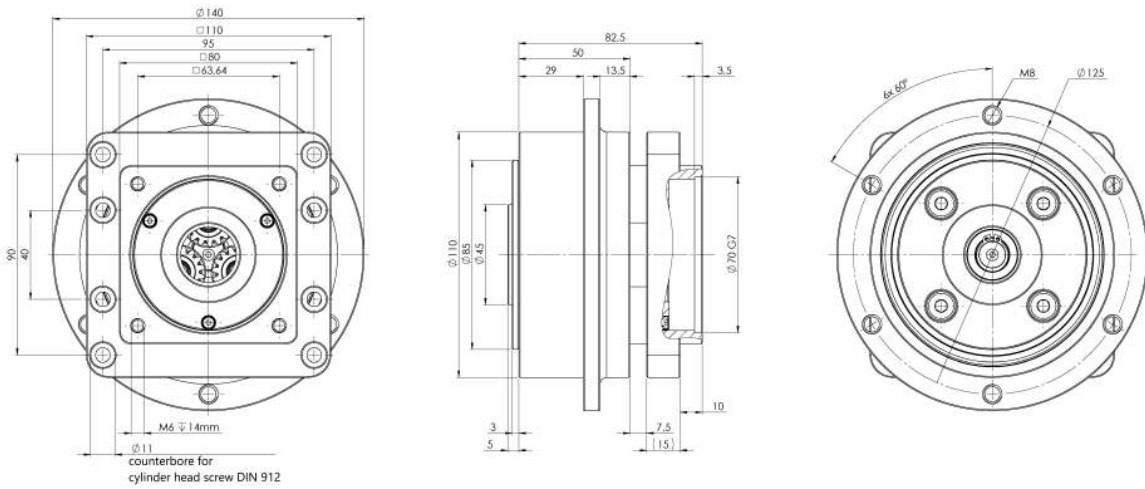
Dimensions – gearbox GB01-PL02H22505001 axial mounting
